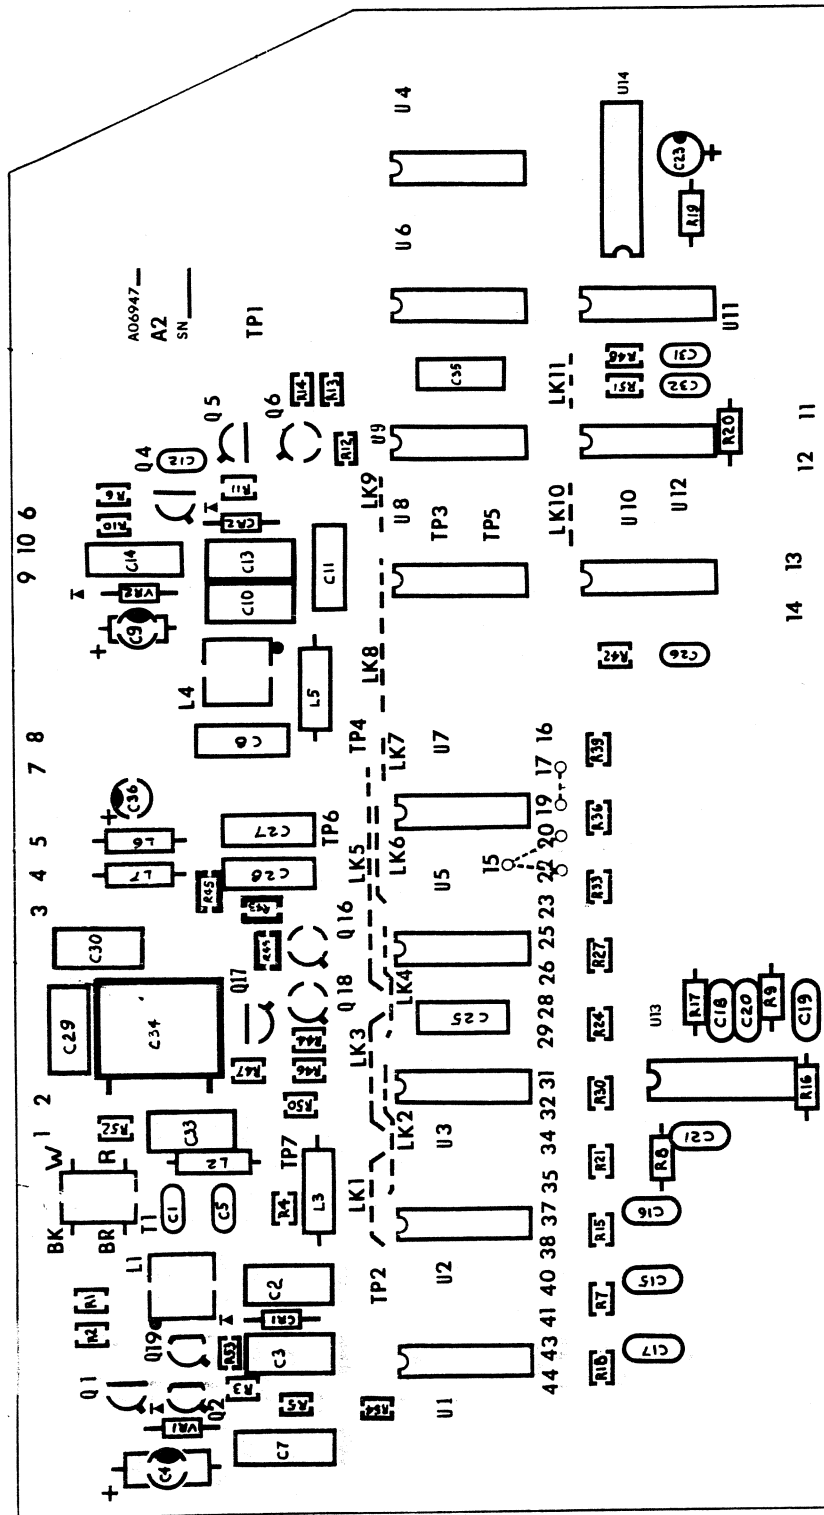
B Upper Loop Board A11A2, Circuit Card Assembly
